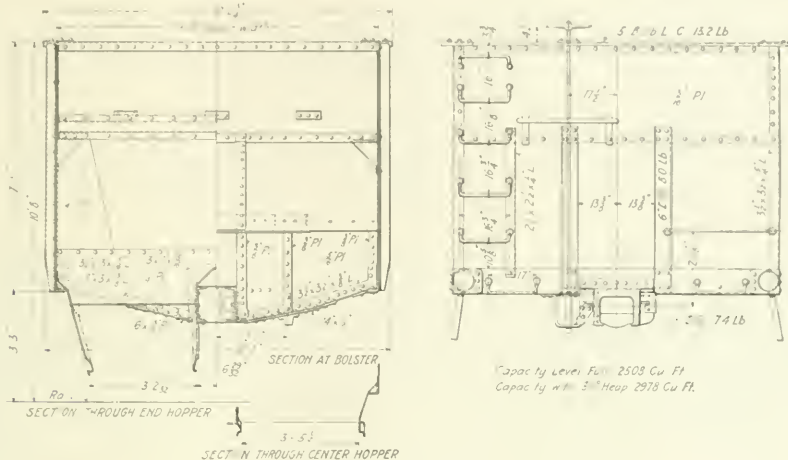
Sections of the Standard 70-Ton Hopper Car
